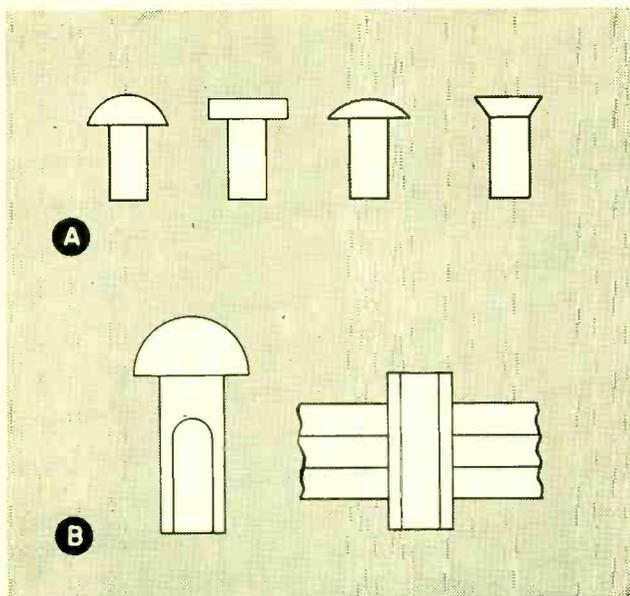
Rivet types; from left to right (A) shows round, flat, brazier and countersunk heads. Tubular rivets (B) include solid head with hollow shank and tubular type
